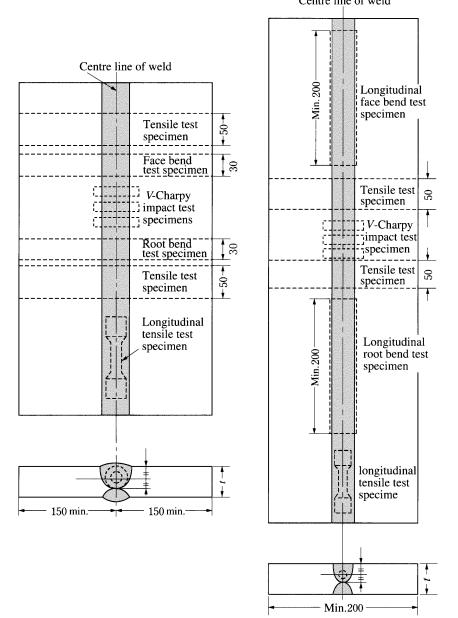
Butt Weld Test Assembly with Multi-run Technique (Unit: mm)
